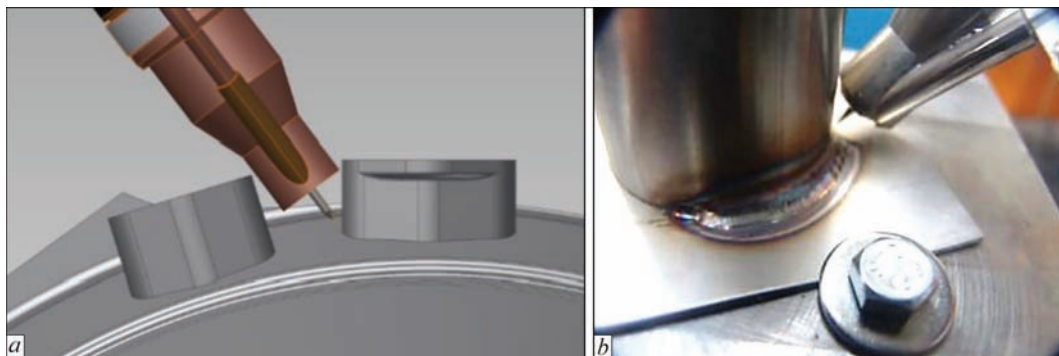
Scheme of TOPTIG welding torch arrangement between welded-on couplings (a) and fragment of weld of model element made by TOPTIG torch (b)
